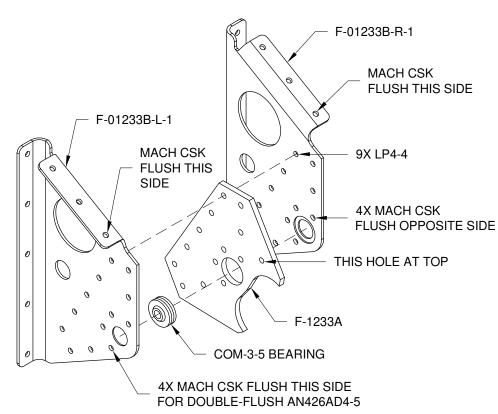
CONTROL COLUMN MOUNT ASSEMBLY (TWO ASSEMBLIES REQUIRED)
